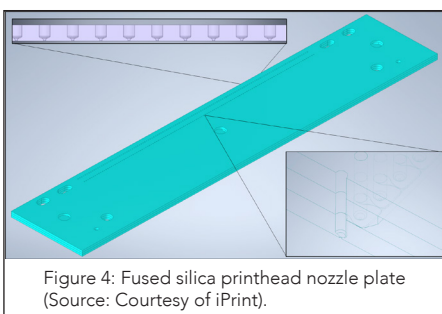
Fused silica printhead nozzle plate (Source: Courtesy of iPrint).
